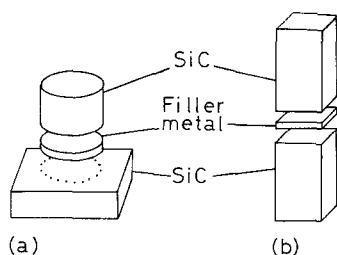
Assembly of brazing couple: (a) for shear test; (b) for bend test.
